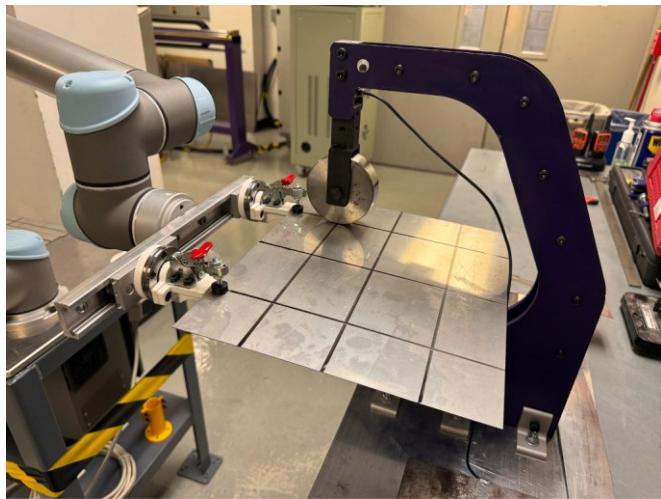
Initial set-up for robot forming utilizing the mini-English wheel.
